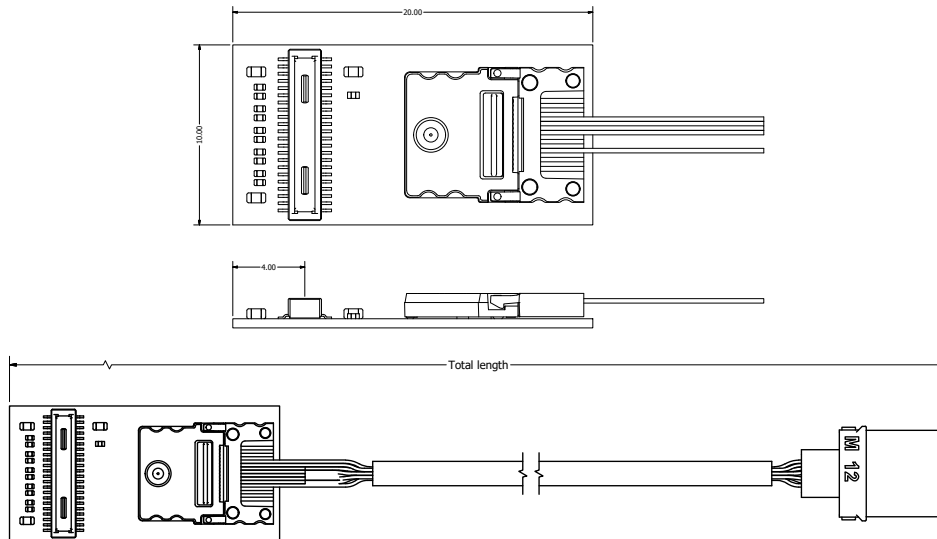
Mechanical dimensions of the VTRx⁺ module.
